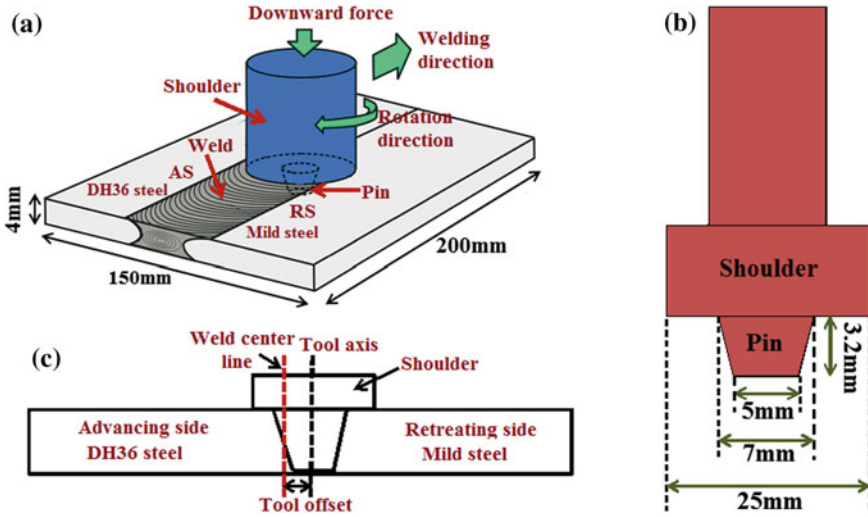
a Schematic representations of FSW to join the DH36 steel to mild steel, b schematic illustration of FSW tool dimension, c position of the tool pin in worksheet
